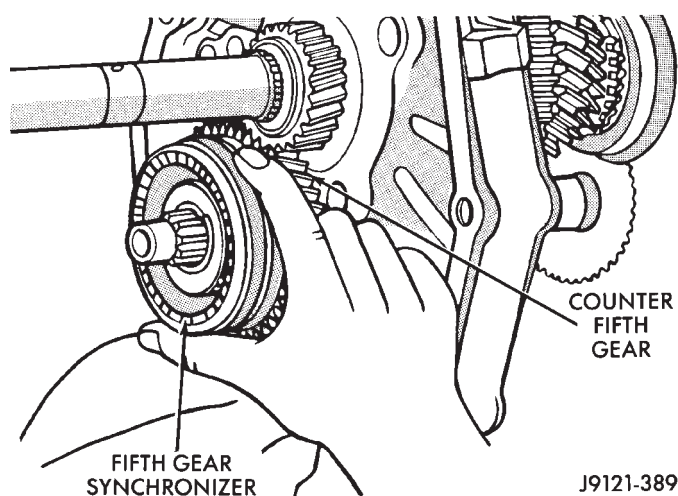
Fifth Gear And Synchronizer Installation (AX 5)
